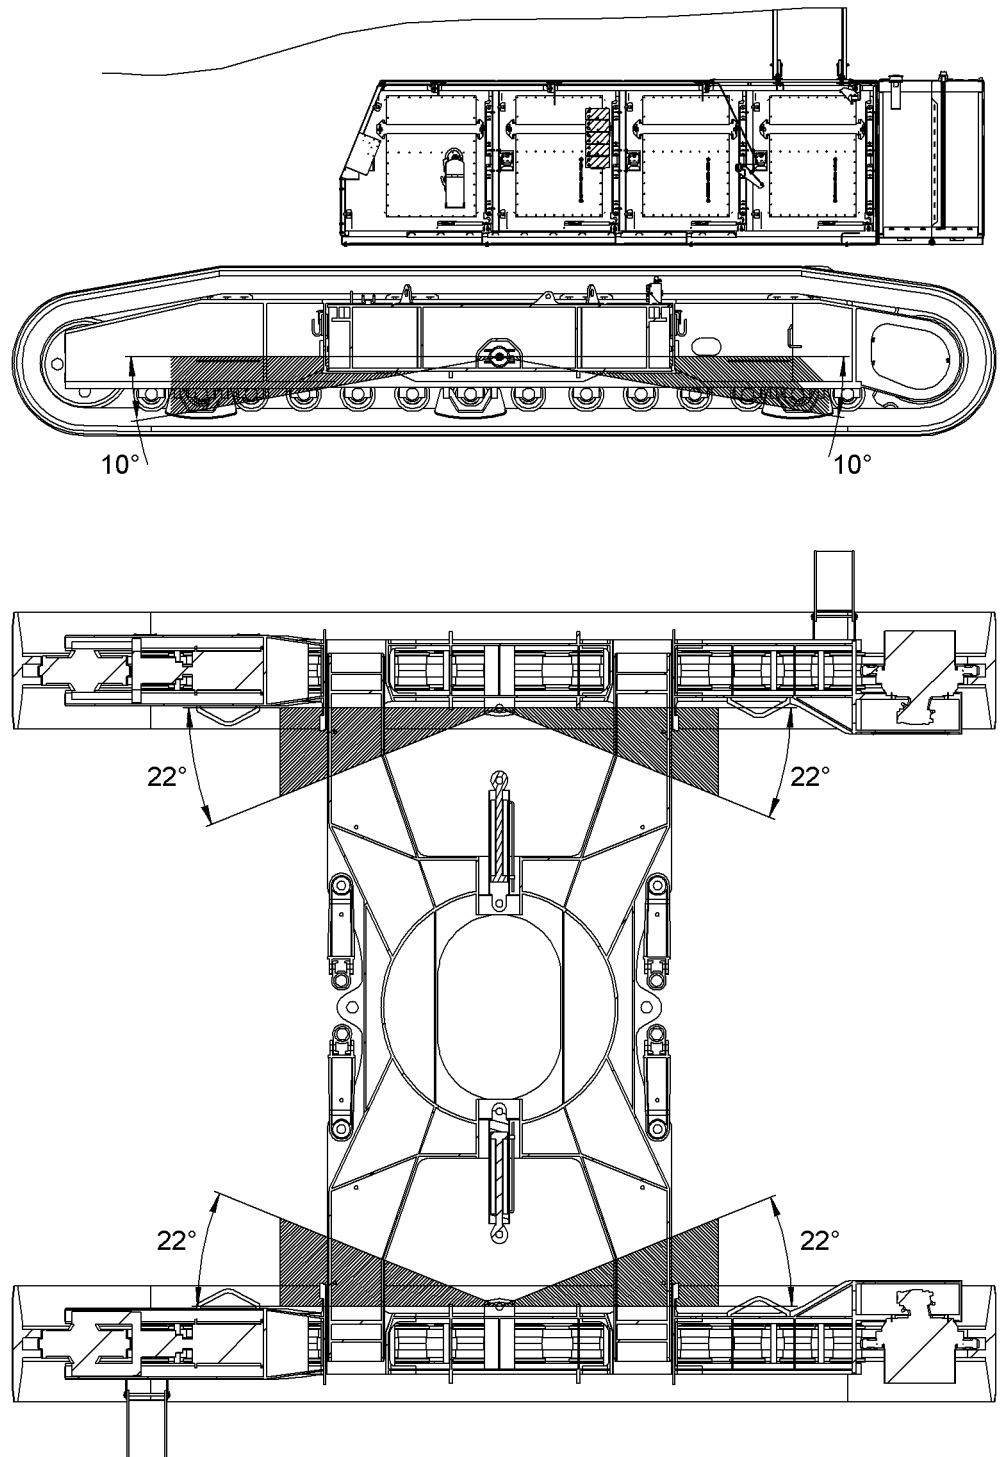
Inner critical angle - transporting the basic machine by ship
